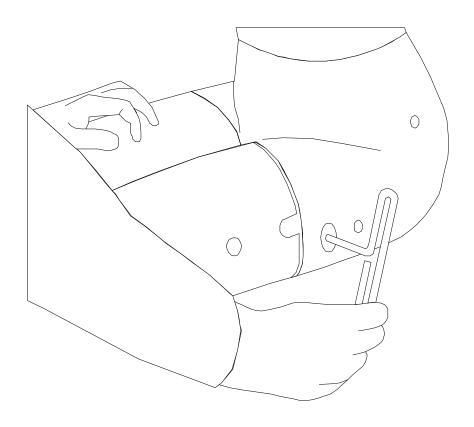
TIGHTEN KNEE JOINT ROTATIONAL BOLT
